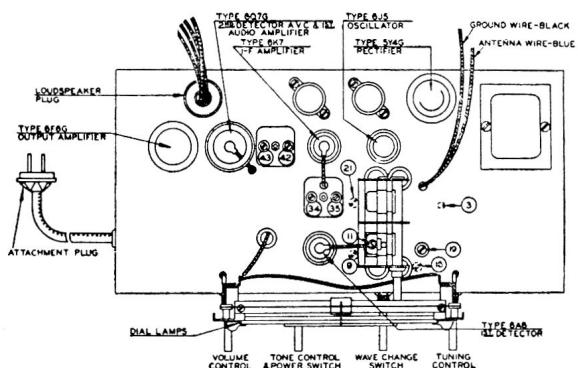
Chassis Layout Showing Controls and Tube Locations—Model 633.
